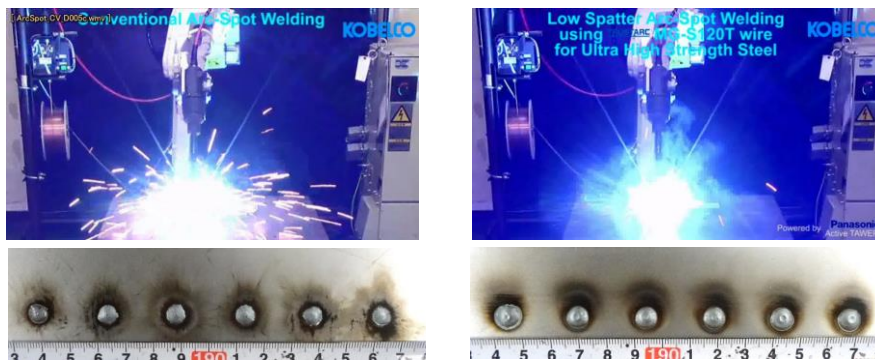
Difference in spatter generation between welding power sources of conventional type (left) and wire feed controlled type (right)
